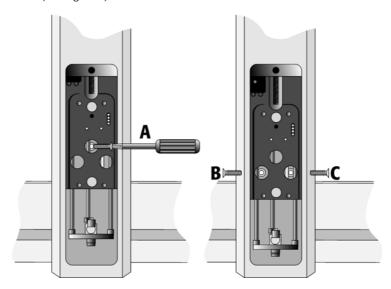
Inserting the Injection Unit Mounting Torx Screws
